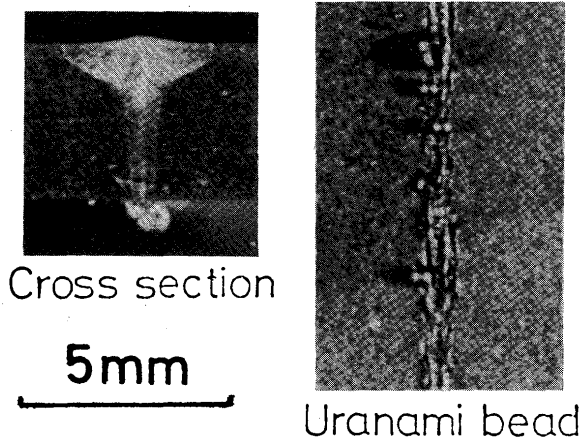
Uranami bead appearance of high speed welding.
